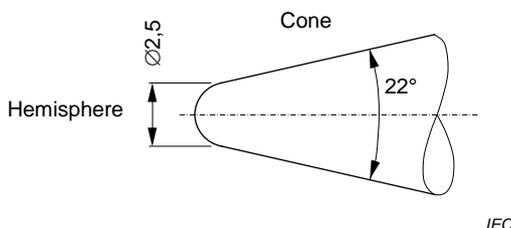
Striker element for test of resistance to mechanical shock impacts induced by sharp-edged objects
